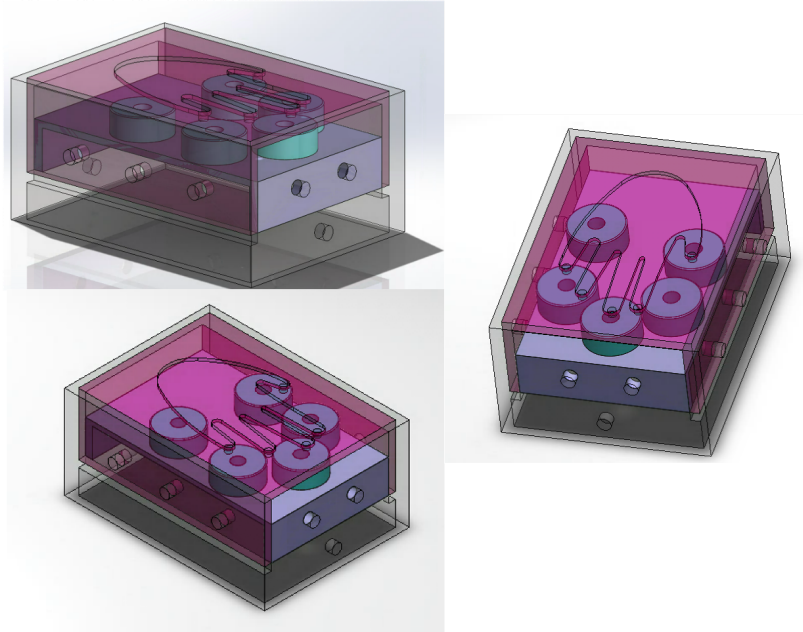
The finalized physical device. The 3D printed handprint base shown in Figure 8 is shown here in magenta. Teal dampening pads are set underneath the base, with space for vibrational motors (not shown). The pads and motors rest atop a metal support that is machined to provide a via for the wiring. The whole structure is then encased in a 4-sided metal box (top and bottom open), with bolts to hold pieces in place. CAD design and images provided courtesy of Maryam Bahadori.
